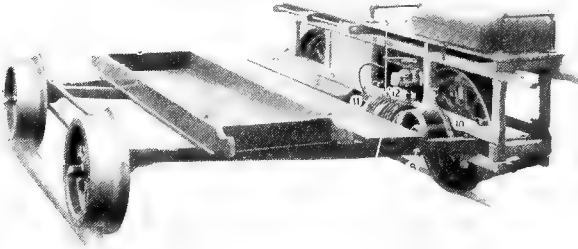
Mudge Class E3 Inspection Car, 4 Hp.,
